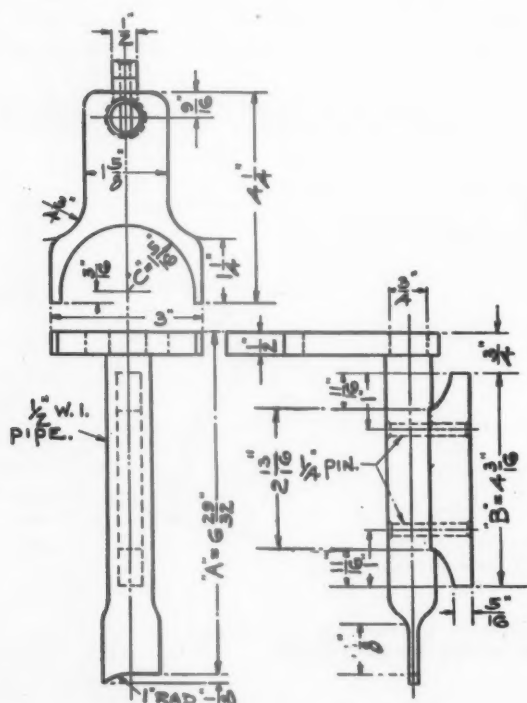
Gage for checking metallic steam-heat connector No. 758
